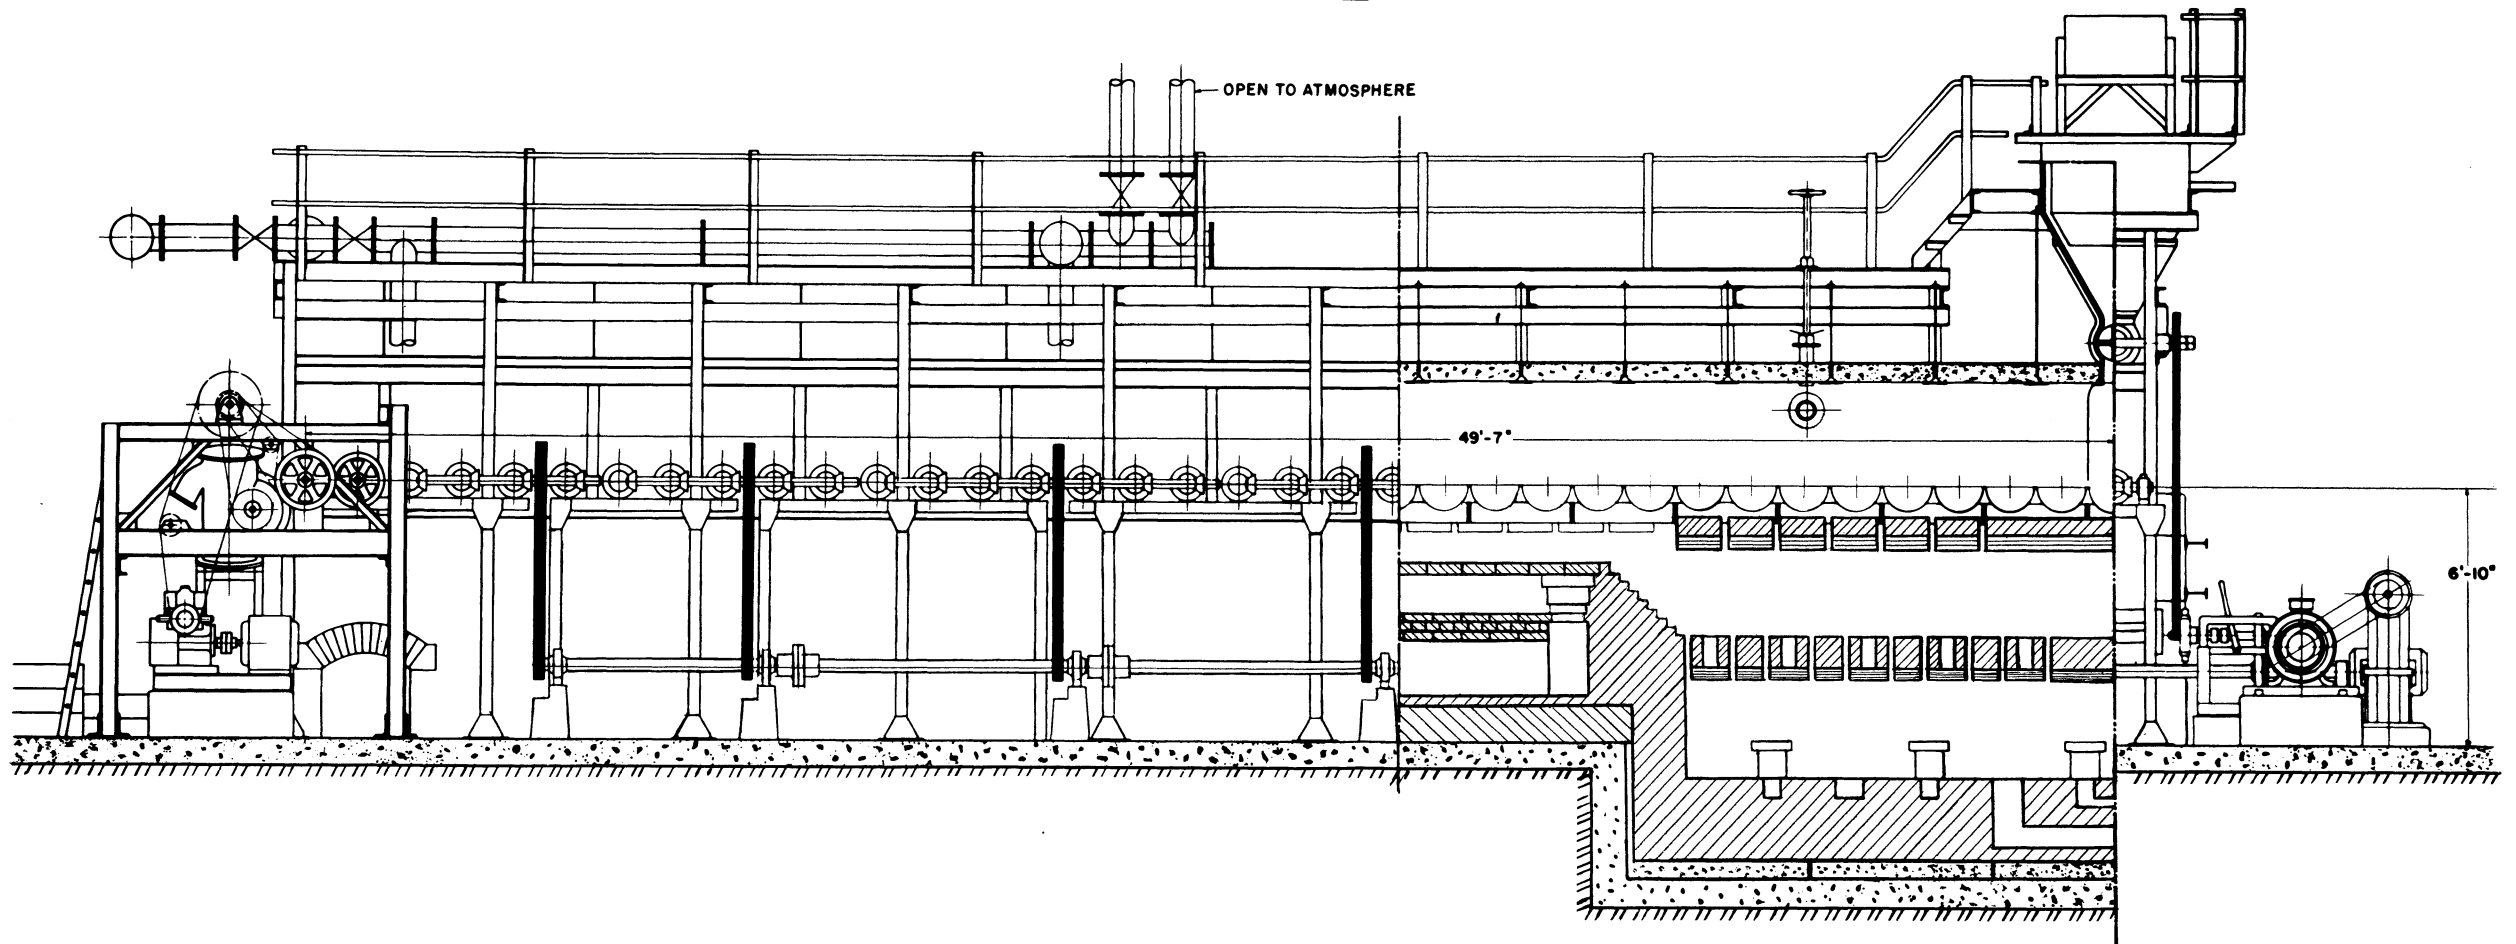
Elevation and sectional elevation of a Salerno retort.
